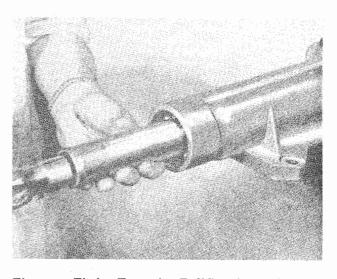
Fitting Extension Ball Bearing and Thrust Washer with Churchill Tool No. 20S. 87.
